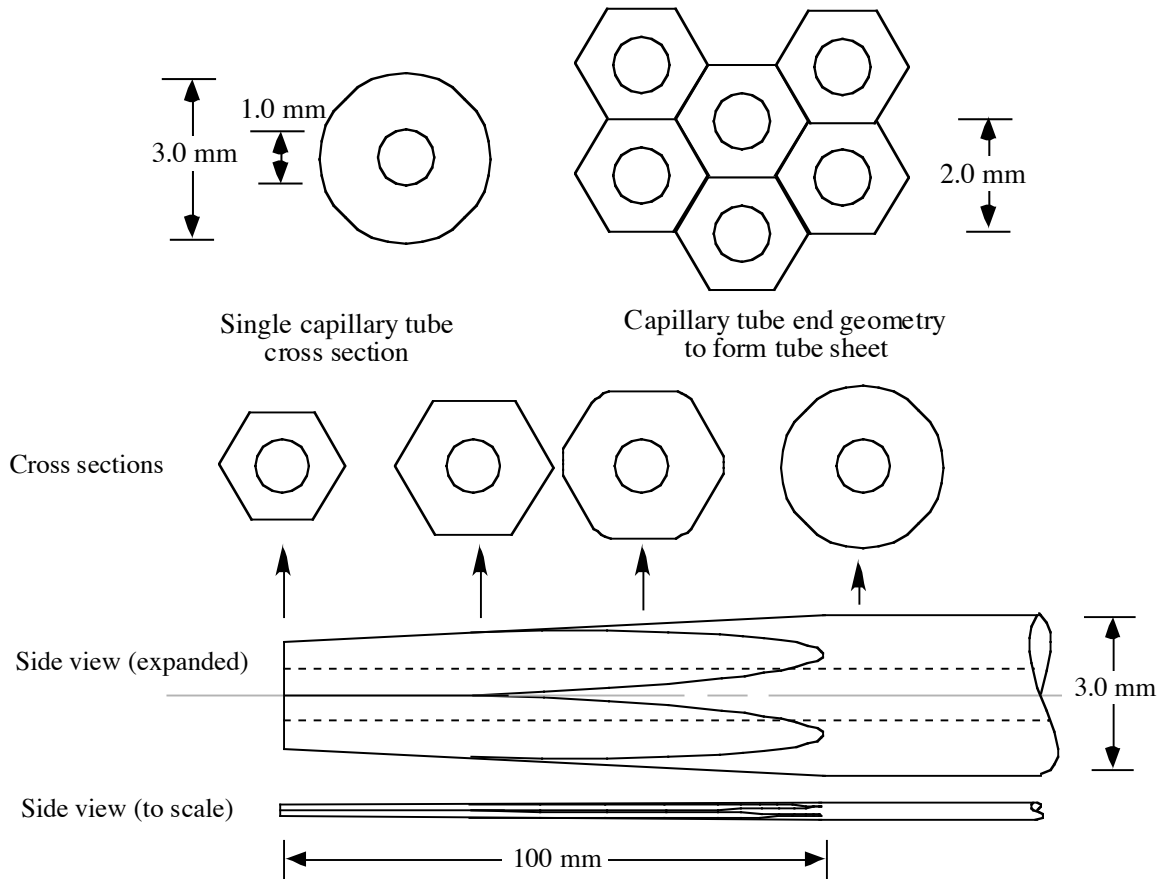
Cross sections and side view of the hexagonal taper on the end of a capillary tube.
